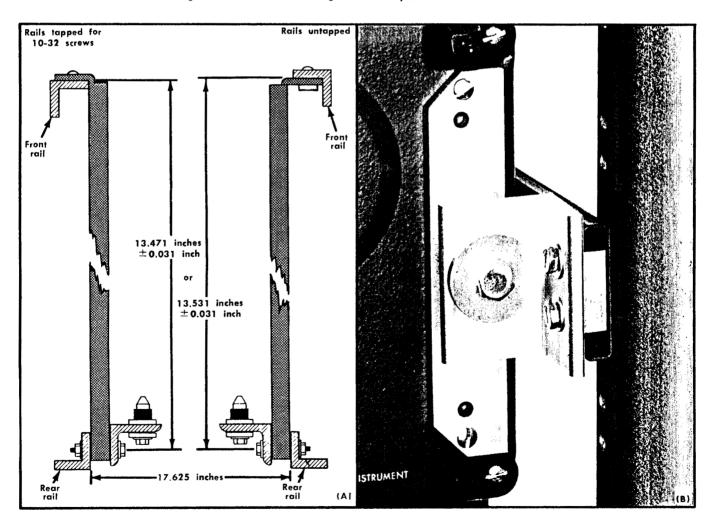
Supporting the rear of the stationary sections; (A) Dimensions necessary; IB) Completed installation.
